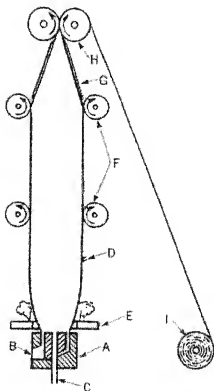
Extrusion of blown film: A, blown-film die; B, die inlet; C, air hole and valve; D, plastic tube (bubble); E, air ring for cooling; F, guide rolls; G, collapsing frame; H, pull rolls; and I, windup roll (20).
